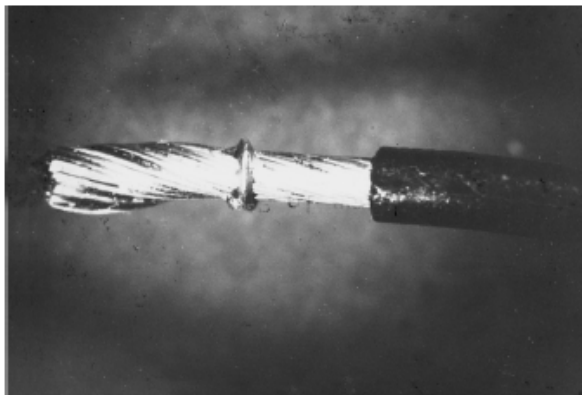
Illustration of Partially Solderable Stranded Wire Showing Incomplete Fillet
